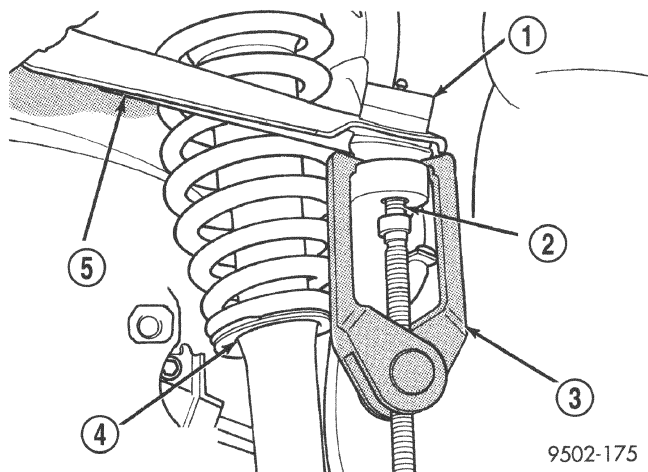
Ball Joint Attachment To Steering Knuckle
